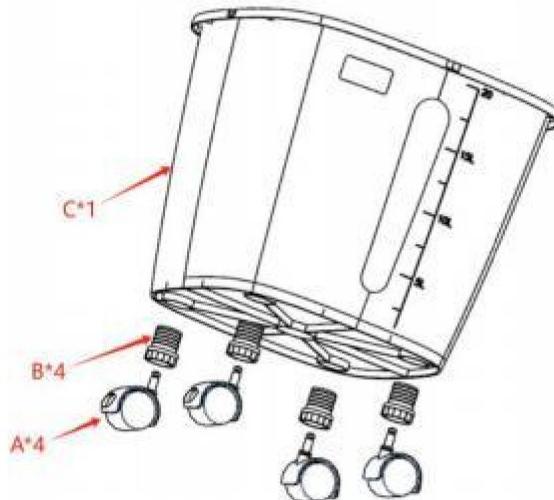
; Install the 4 pad feet and 4 wheels into the holes in the bottom of the tank as shown.
